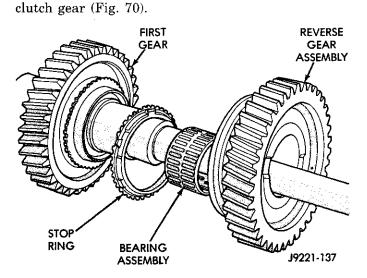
Reverse Gear, Bearing And Stop Ring Removal
